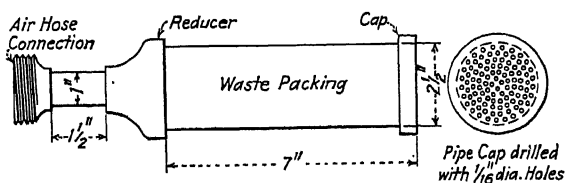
NOZZLE FOR DIFFUSING COMPRESSED AIR IN RAISES.
